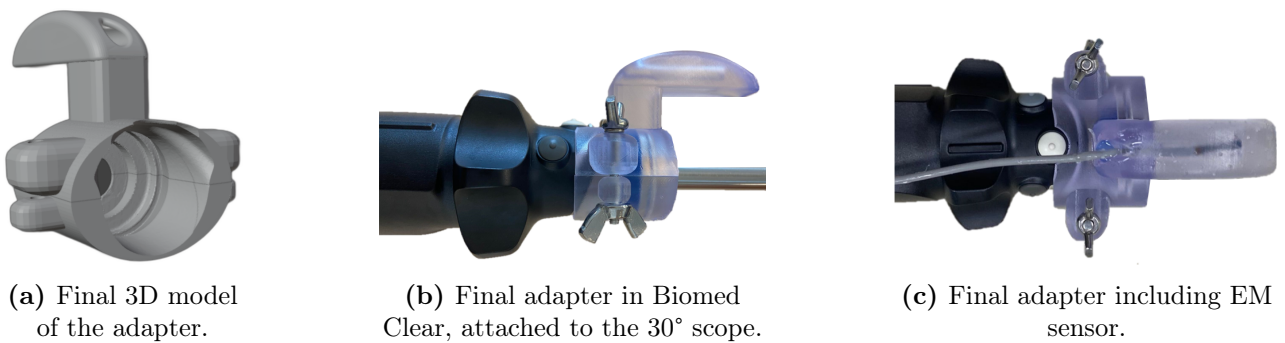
Final design of the adapter of the horizontally positioned buttons 30° scope.
